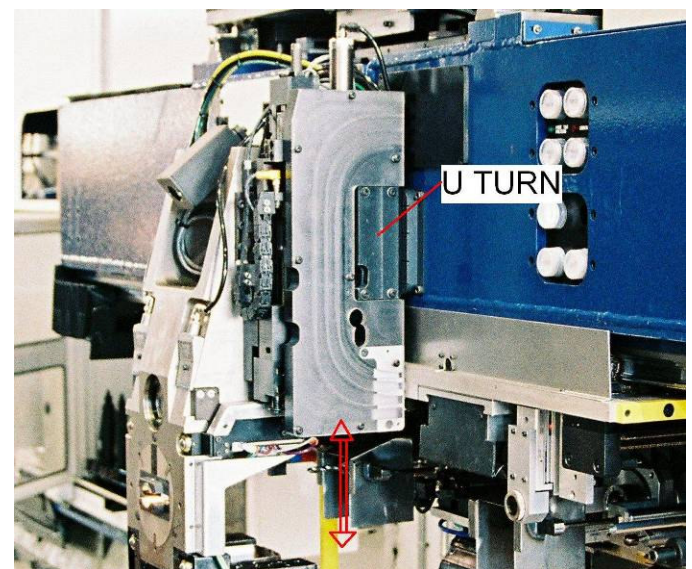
Rivet U-turn on pre-SA2 LVER machine.
